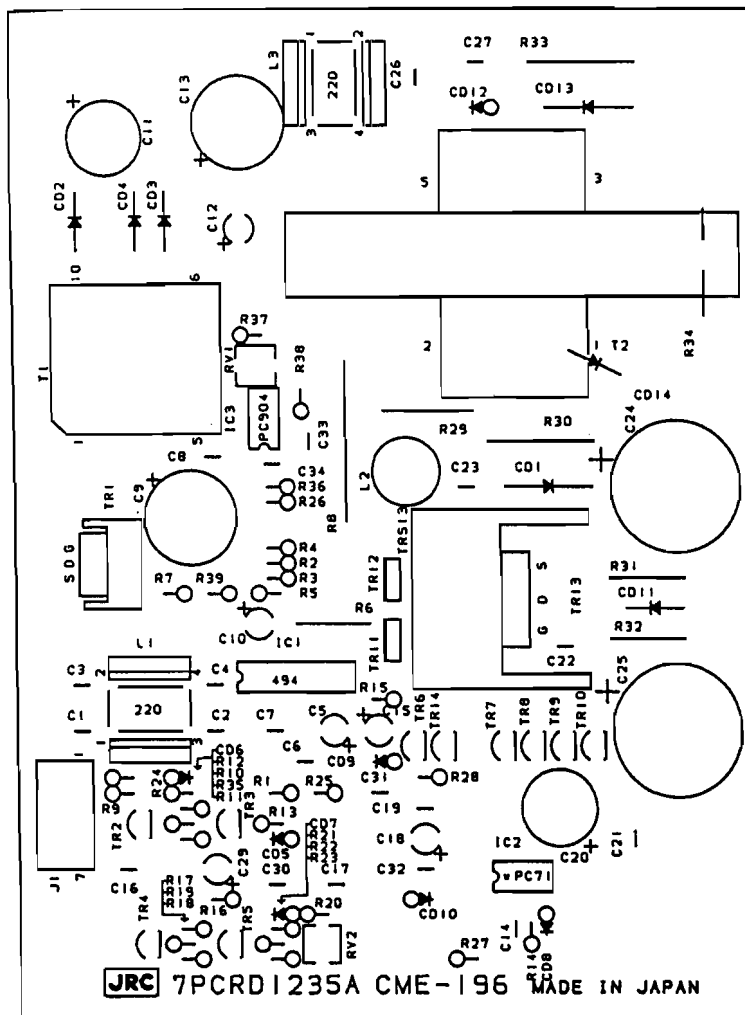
COMPONENT LOCATION DRAWING, MODULATOR PCB (CME-196)
